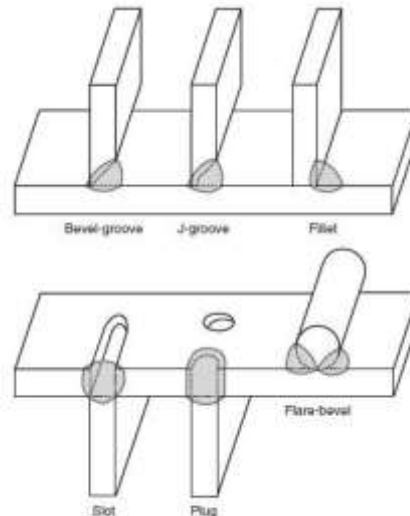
Types of welds that may be made with a basic T-joint.
